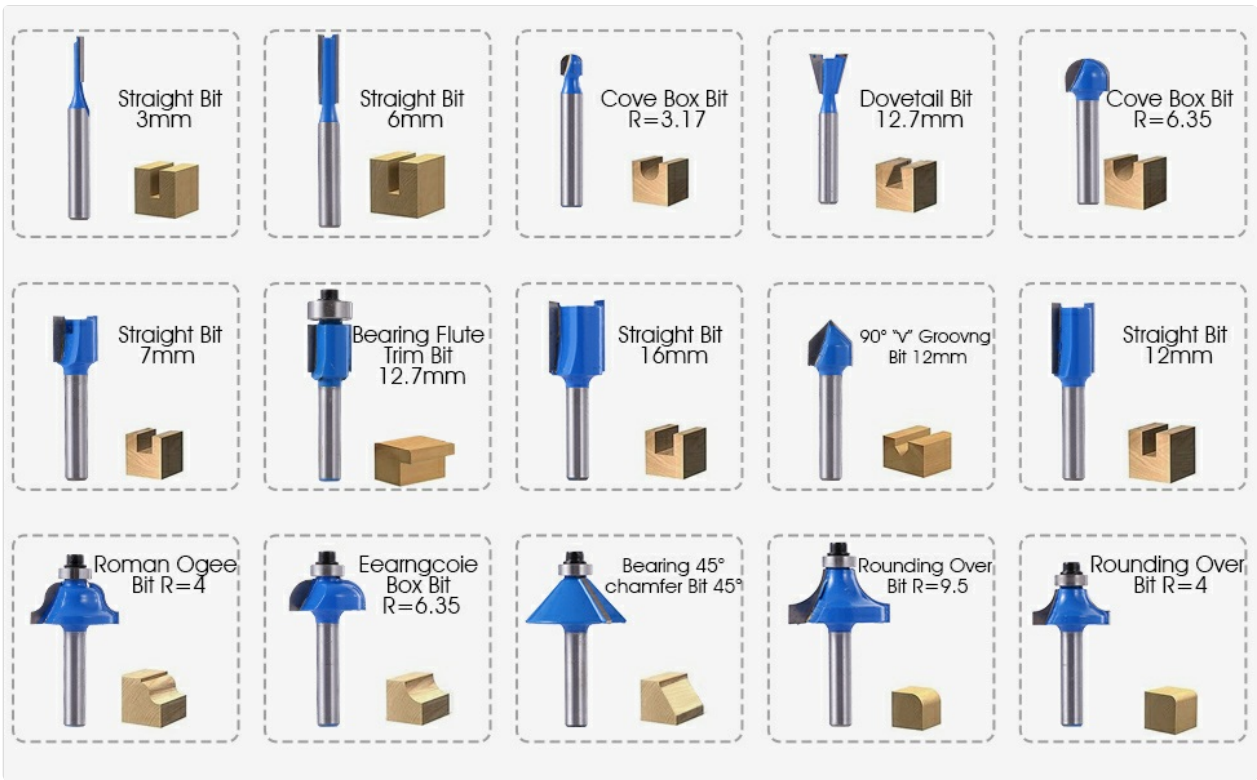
A detailed view of the 15-piece 1/4 inch (6.35mm) milling cutter set, showing various bit profiles and their dimensions.
